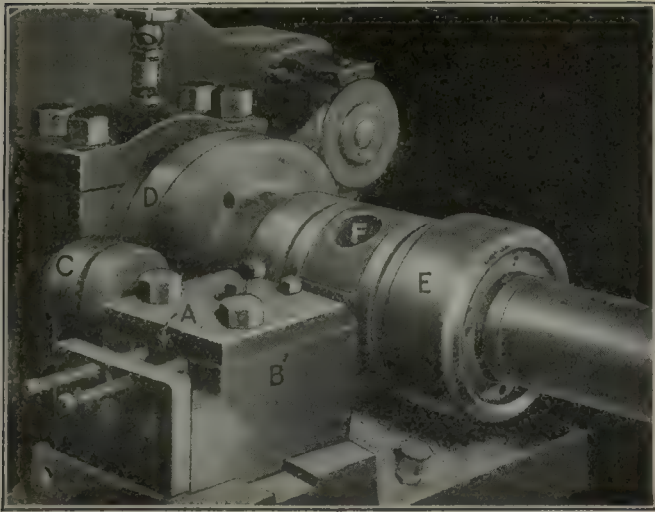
CUTTING RELIEF ON SIDE OF PISTON
